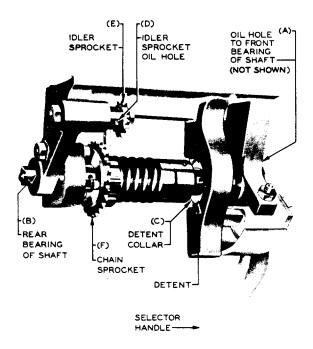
Lubrication Points — Selector Handle — Chain Removed
